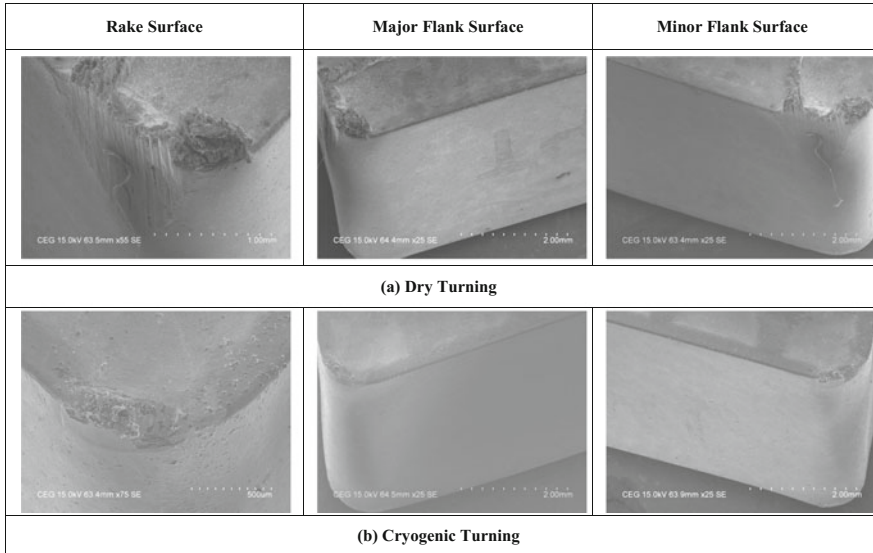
, 4, and 5 show the SEM photograph views (rake, major, and minor flank surfaces) of worn-out tips for turning Inconel 625 with PVD-TiAlN-coated carbide inserts after a machining length of 100 mm with varying cutting speeds (43, 71, and 118 m/min) under dry and cryogenic cutting conditions. It was observed from the SEM views of Figs. 3, 4, and 5 that both rake and flank surface wears (crater wear, main and auxiliary flank wears) increased with the increase in cutting speeds under dry and cryogenic turning. At low cutting speed of 43 m/min, the major flank as well as the rake face underwent substantial wear in dry turning. There is loss of material below the main cutting edge surface; i.e., main flank surface and also some peel off material were observed under dry machining. The flaking of material on the rake surface near the main cutting edge and small amount of chip adherent was observed in rake face. As the cutting speed was increased to 71 m/min under dry turning, flaking was observed on the face of tool near the cutting point of the tool. There is substantial wear in the major and auxiliary flank surfaces. Nose of the tool underwent wear and adherent deposits of chip material was observed on rake surface in dry turning. At higher cutting speed of 118 m/min, the higher worn out at the nose and auxiliary flank surface was observed under dry turning. High flaking in the auxiliary surface and peel off in the rake surface near the corner as well as major and minor cutting edge surfaces were observed under dry turning. The SEM photographs in Figs. 3, 4, and 5 clearly show that the tool wear is substantially
